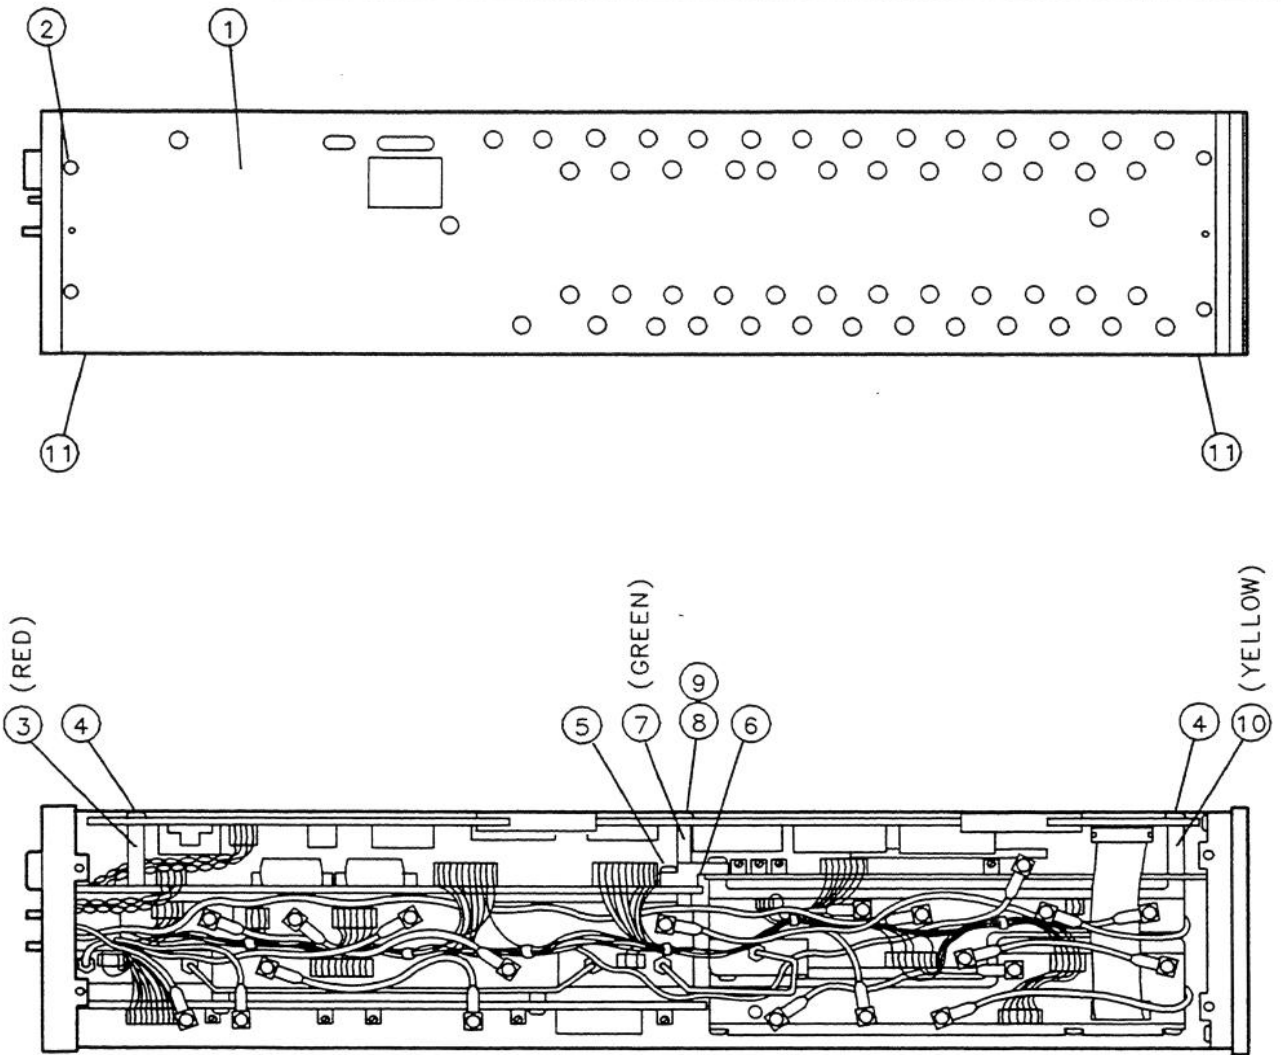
Parts Identification, A1 Front-Frame Assembly
